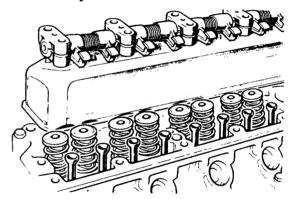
Using the rocker cover to retain the rocker shaft assembly.
